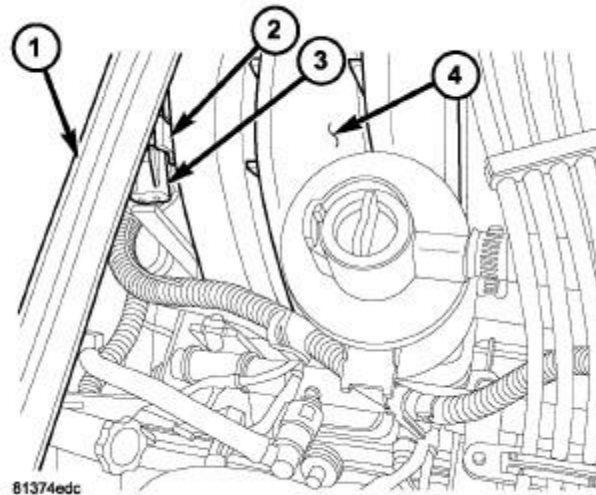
Electrical Connector, Cowl/Hood Seal, Manifold Absolute Pressure (MAP) Sensor & Intake Manifold
